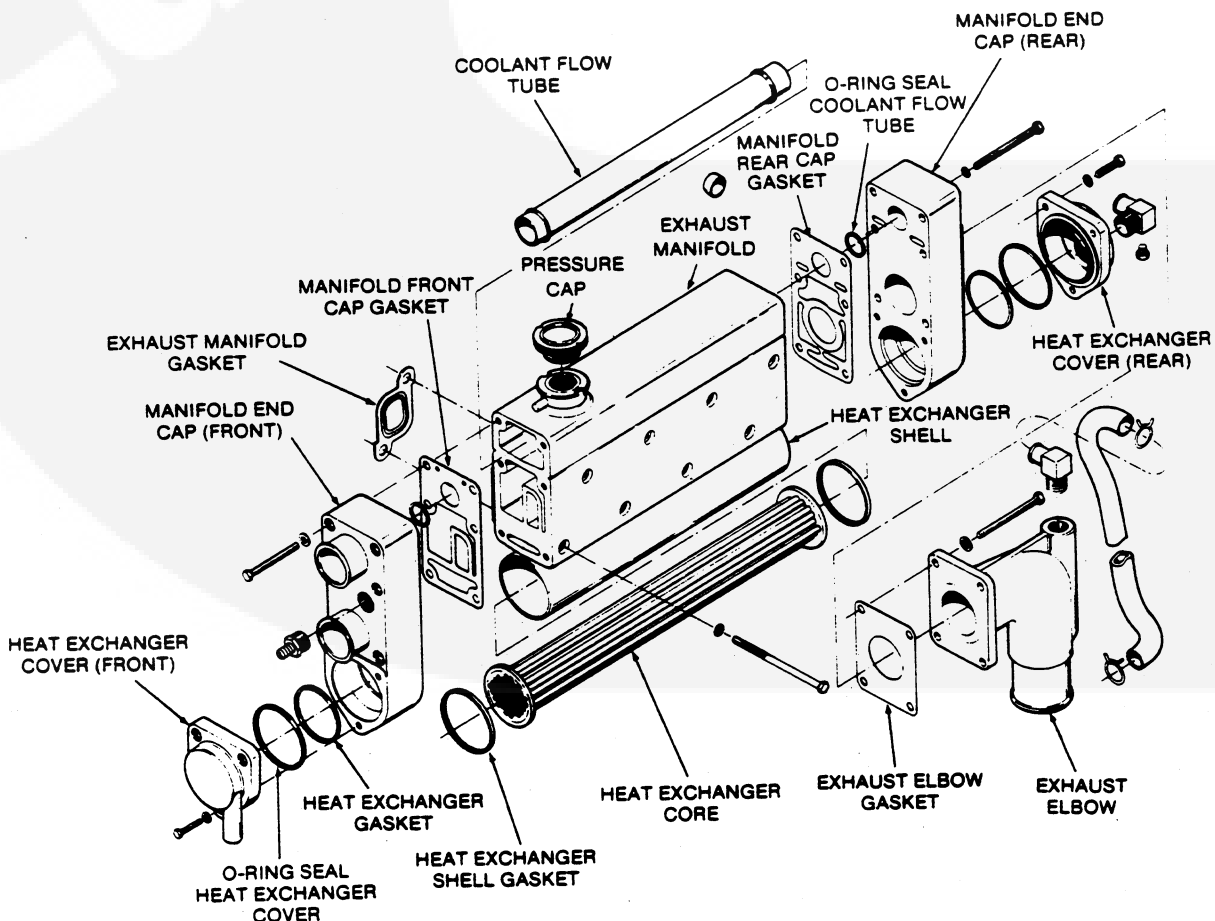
HEAT EXCHANGER ASSEMBLY
